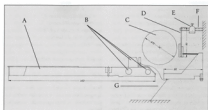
Melodion: Cross section of the mechanics. A = Key, B = Weights, C = Cylinder, D = Friction rod (spring), E = Weight for intonation, F = Sounding tube, G = Wire.
